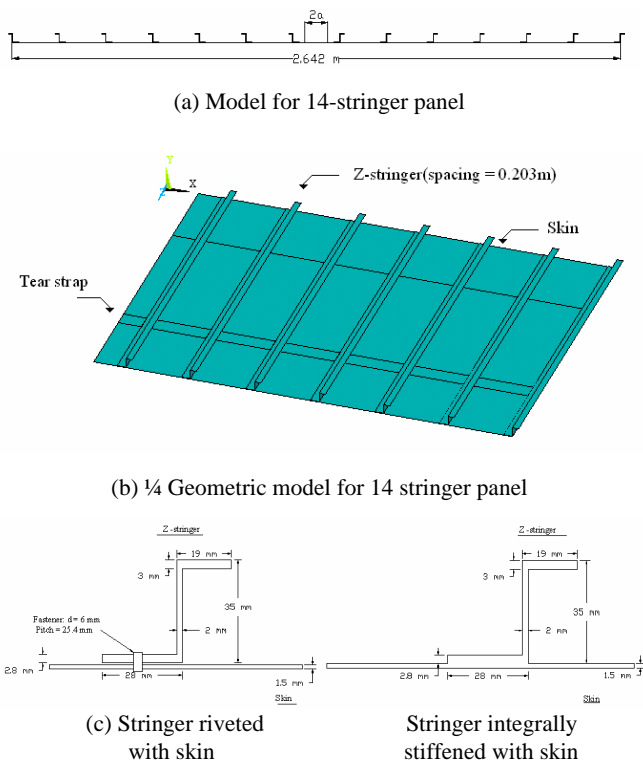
Geometry of integrally stiffened panel and riveted stiffened panel
